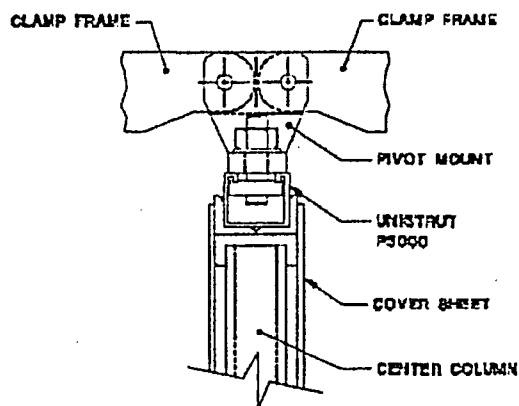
Upper Clamp Frame Attachment Detail
